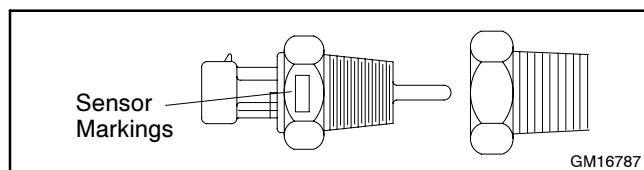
Coolant Temperature Sensor and Reducer Bushing (if equipped), Typical
